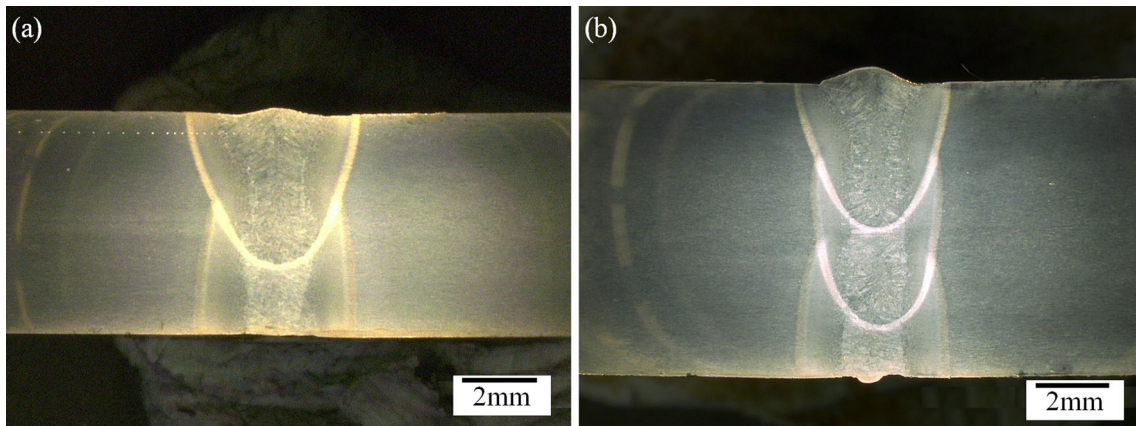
Cross sections of ultra-narrow gap laser welds in S960 steel: a 6 mm thick cross section; b 8 mm thick cross section (laser power, 2 kW; welding speed, 0.6 m/min; wire feed rate, 3.3 m/min)
